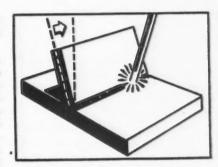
"Backstep" method of welding reduces shrinkage forces
